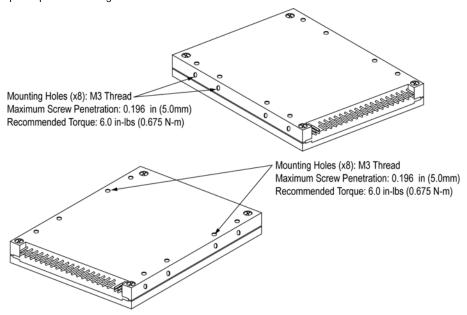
Zeus 2.5-Inch Mounting Hole Locations
